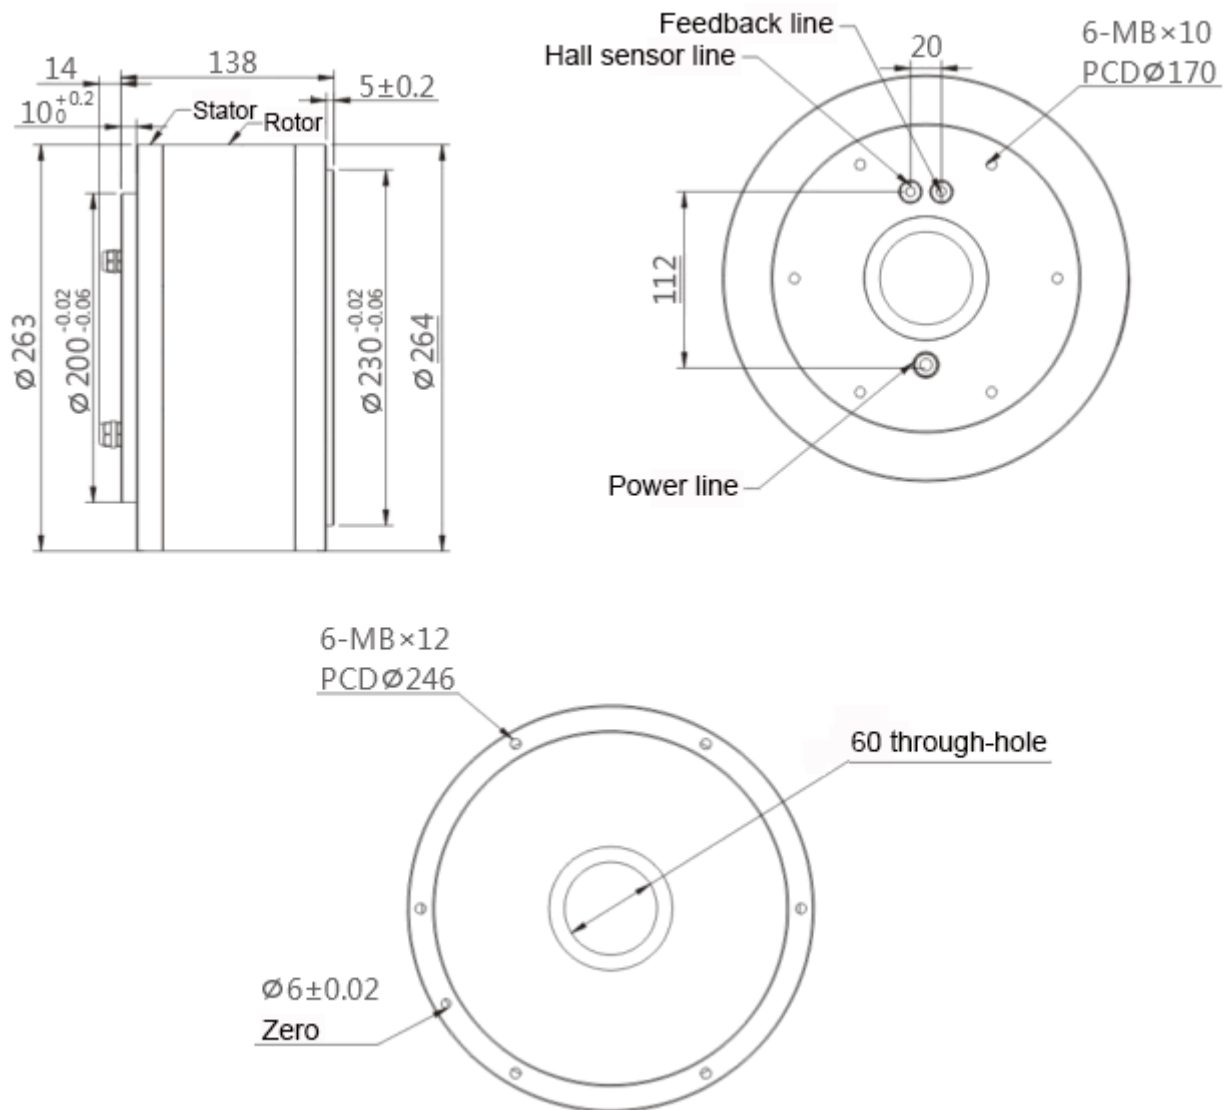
Outline dimensional drawing of WZCR-D263H-138 motor
